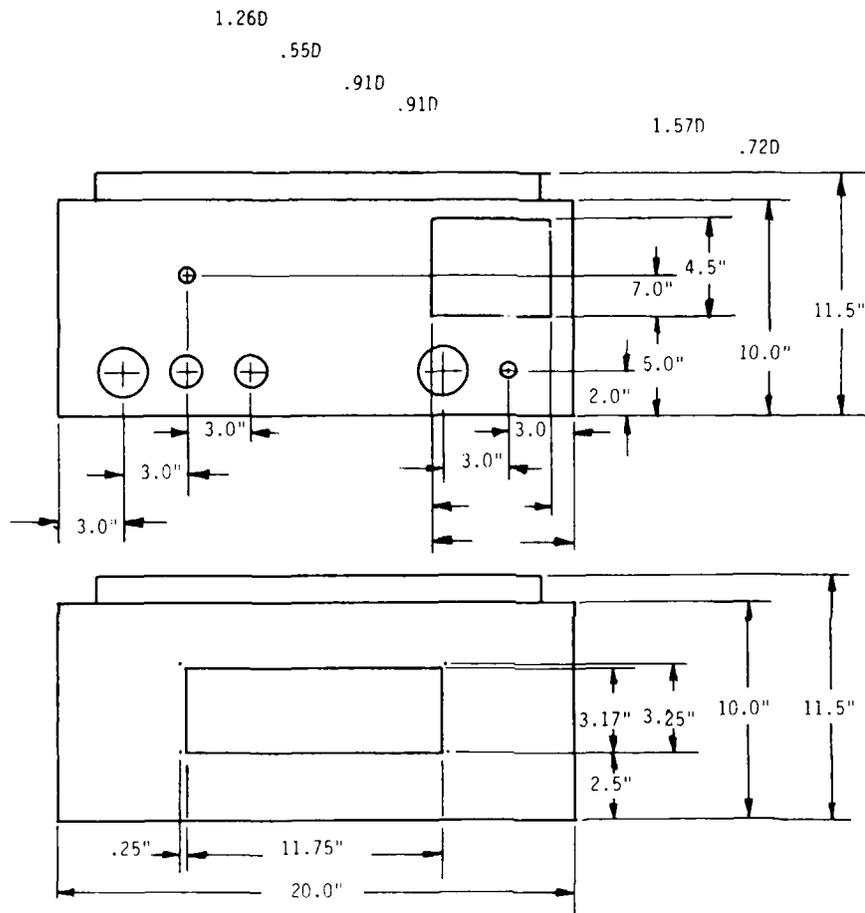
24 x 20 x 10 steel electronics enclosure, front and back; unless otherwise specified, tolerances are  $\pm .02$
